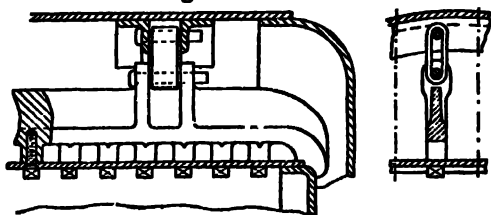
Section and elevation of one half of a girder stay for a locomotive fire-box.
